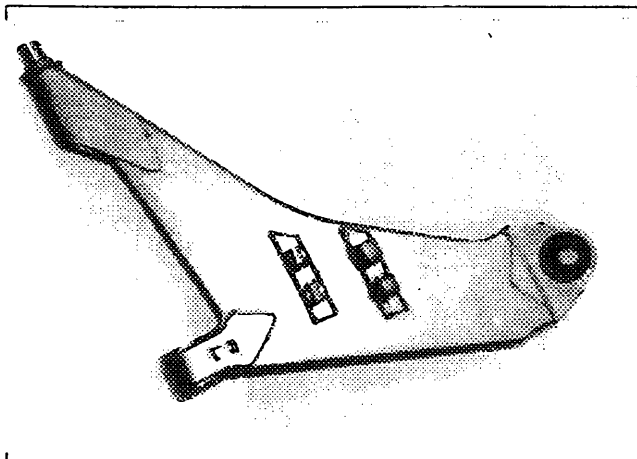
REINFORCED LOWER ARM, FRONT TYPE B
